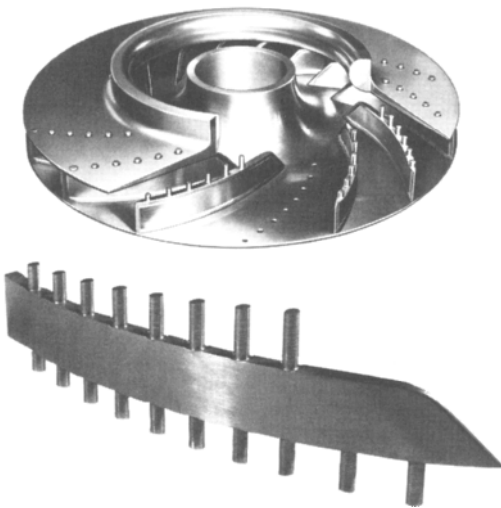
B. A special design riveted wheel, used only on small wheels where welding is impractical. (Used by permission: Elliott® Company.)
